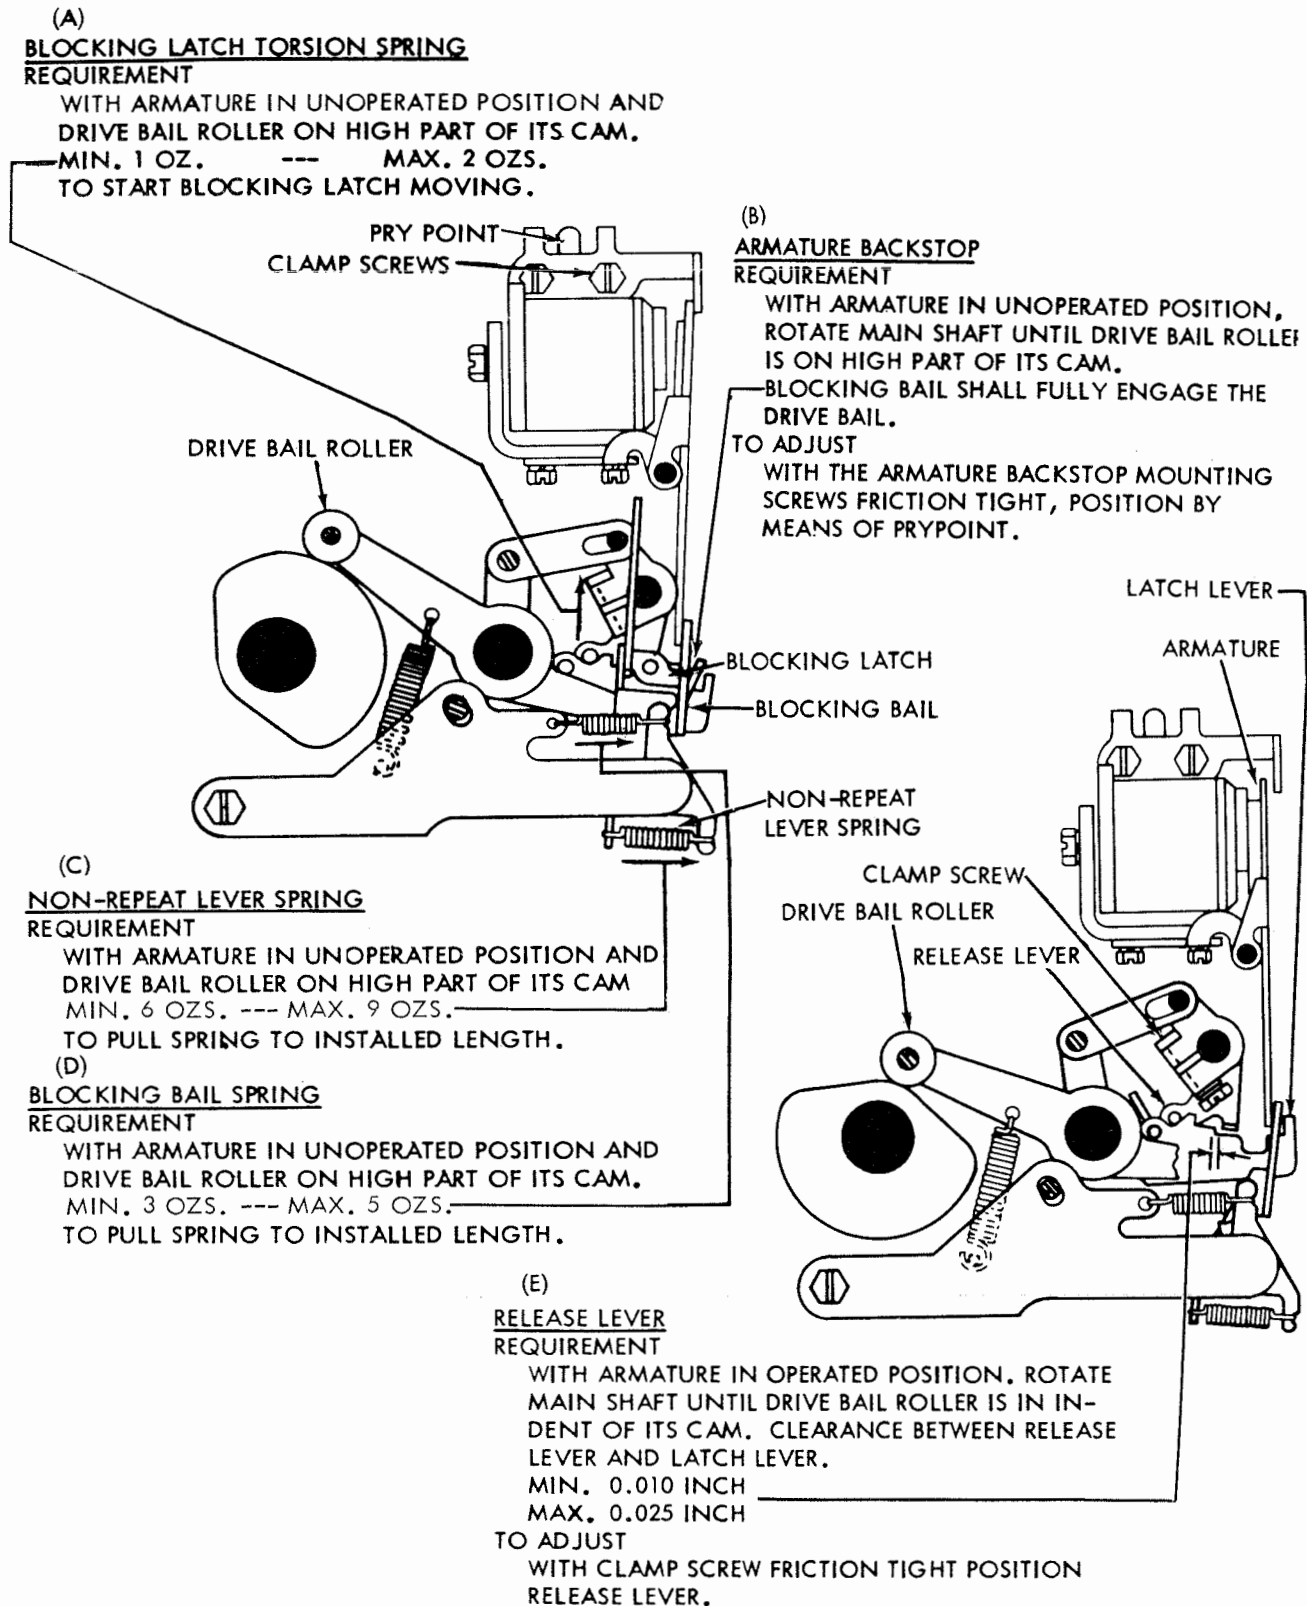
B. TYPING REPERFORATOR TT-375/UG, REMOTE CONTROL NON-INTERFERING BLANK TAPE FEED-OUT MECHANISM - LATEST DESIGN
